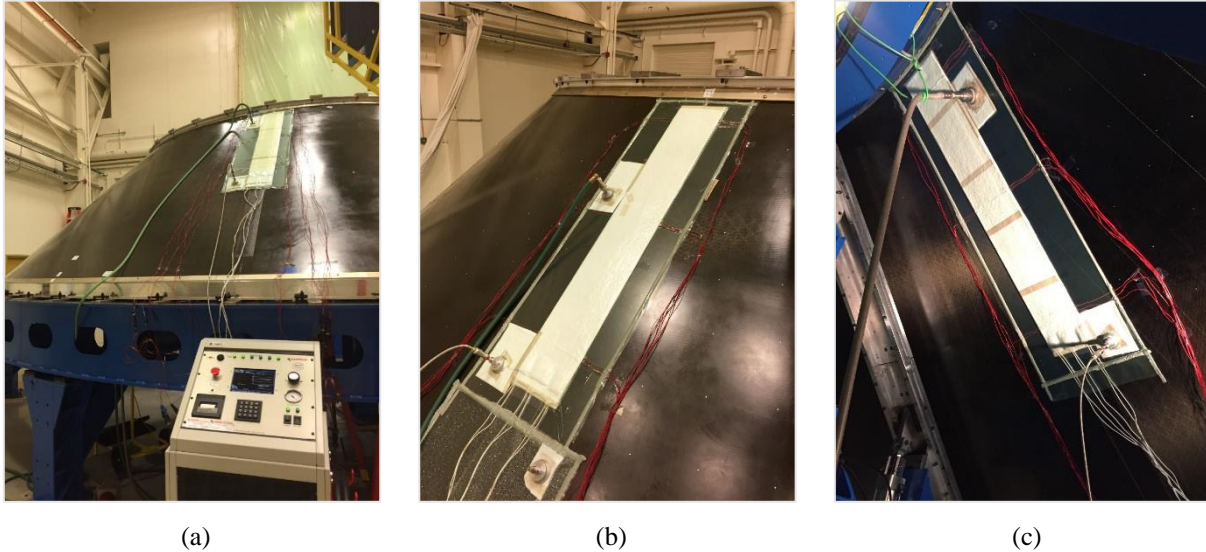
Doubler cure/bonding for a forward end joint segment on the PLA MDA: (a) hot bonder/heat blanket setup for forward end doublers, (b) cure/bonding setup for forward end outer mold line doubler, and (c) cure/bonding setup for forward end inner mold line doubler. Note that both doublers shown here were cured simultaneously.
